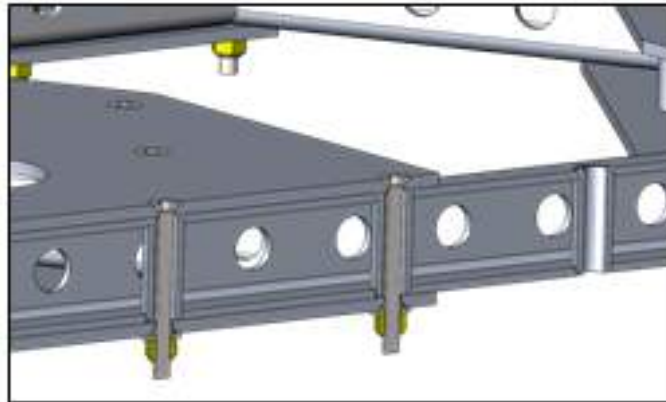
Cross Sectional View of the Chassis Crush Tubes.
